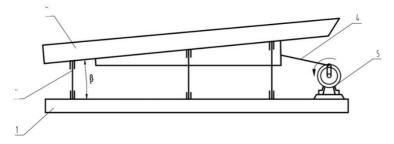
Structure diagram of eccentric vibration motor with elastic link; 1: Bottom frame; 2: Spring plate; 3: Vibrating bed; 4: Connecting rod eccentric mechanism; 5: Motor
